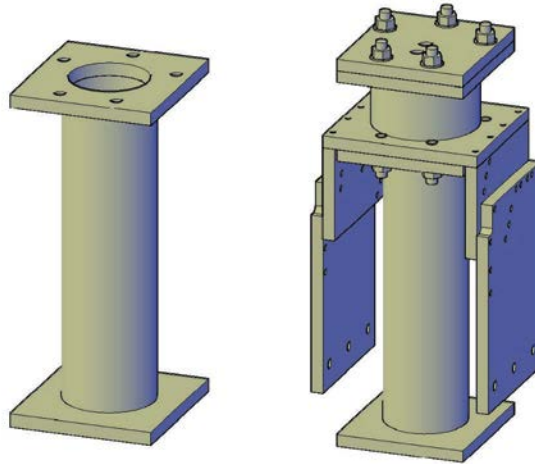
Combustion Chamber Volume Extension and Assembly.
